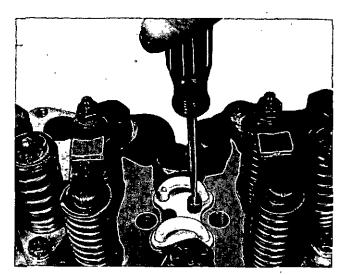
Installing fuel connector – NH-5-1/2" bore
